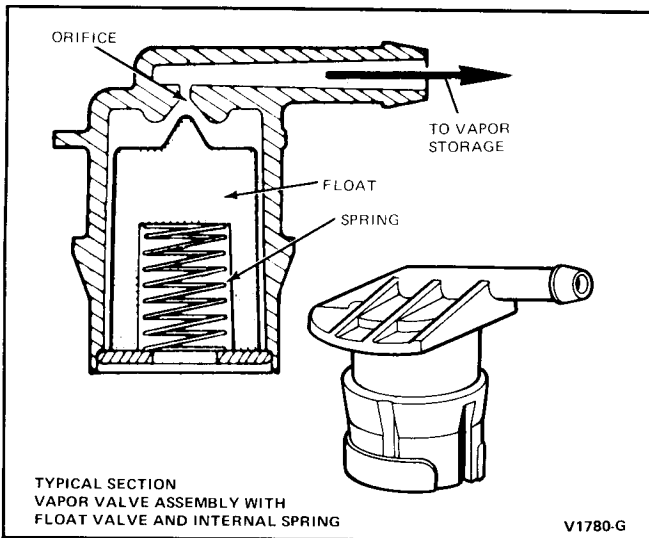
Fuel Tank Vapor Orifice and Roll Over Valve Assembly
